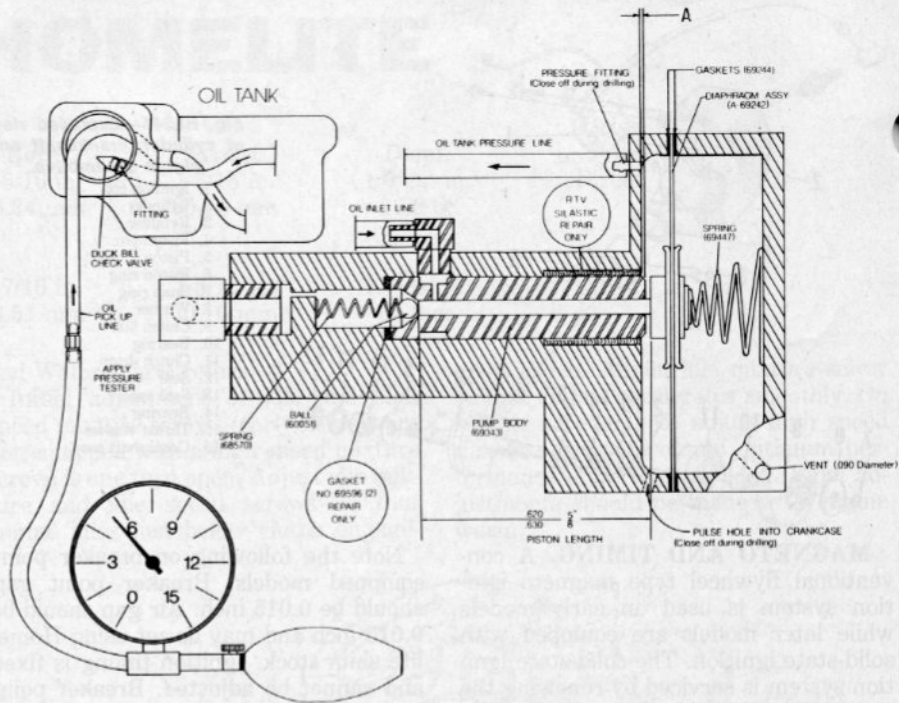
Diagram showing pressure tester hook-up and diaphragm oil pump components.
